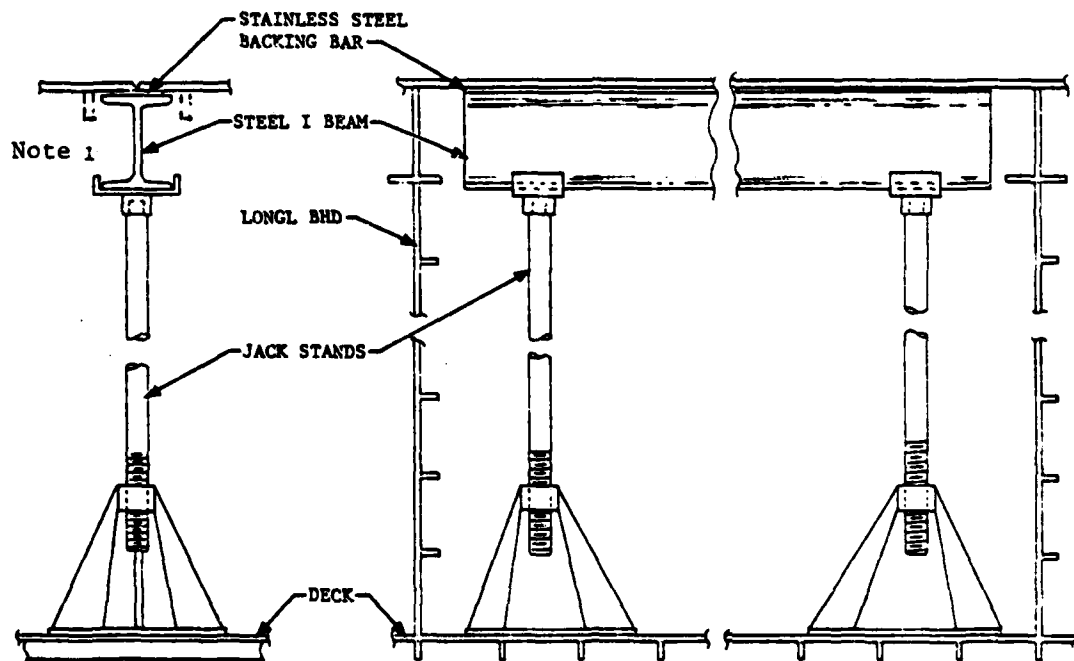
Typical Plate Alignment Aids (Sheet 1 of 3).
